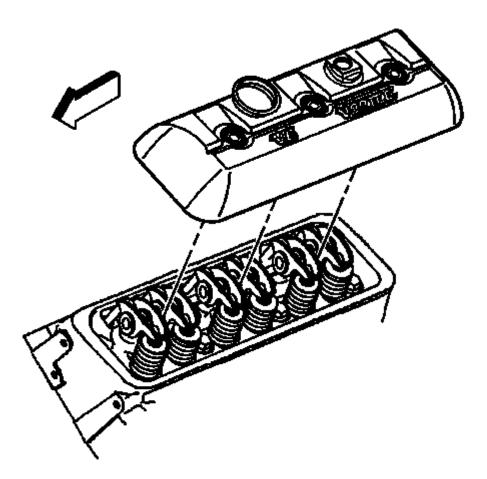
View Of Valve Rocker Arm Cover (Left) Courtesy of GENERAL MOTORS CORP.
